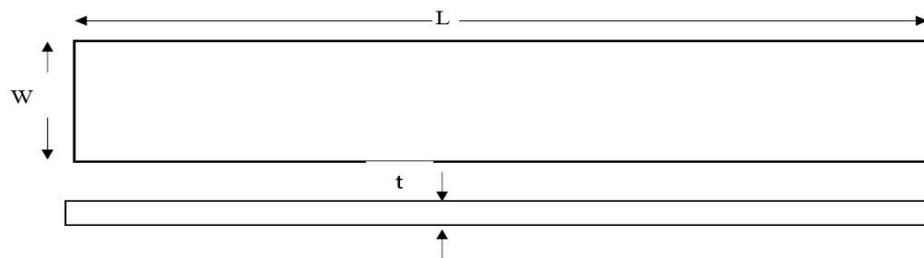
Flexural Test Specimen according to ASTM Standards [29].
